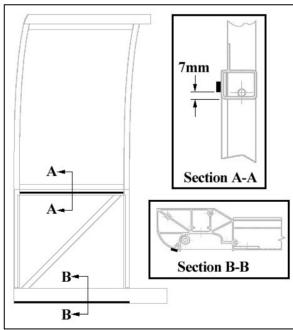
SIDE PANEL INSTALLATION - DOUBLE FACE ADHESIVE TAPE APPLICATION ON THE SLIDE-OUT STRUCTURE
